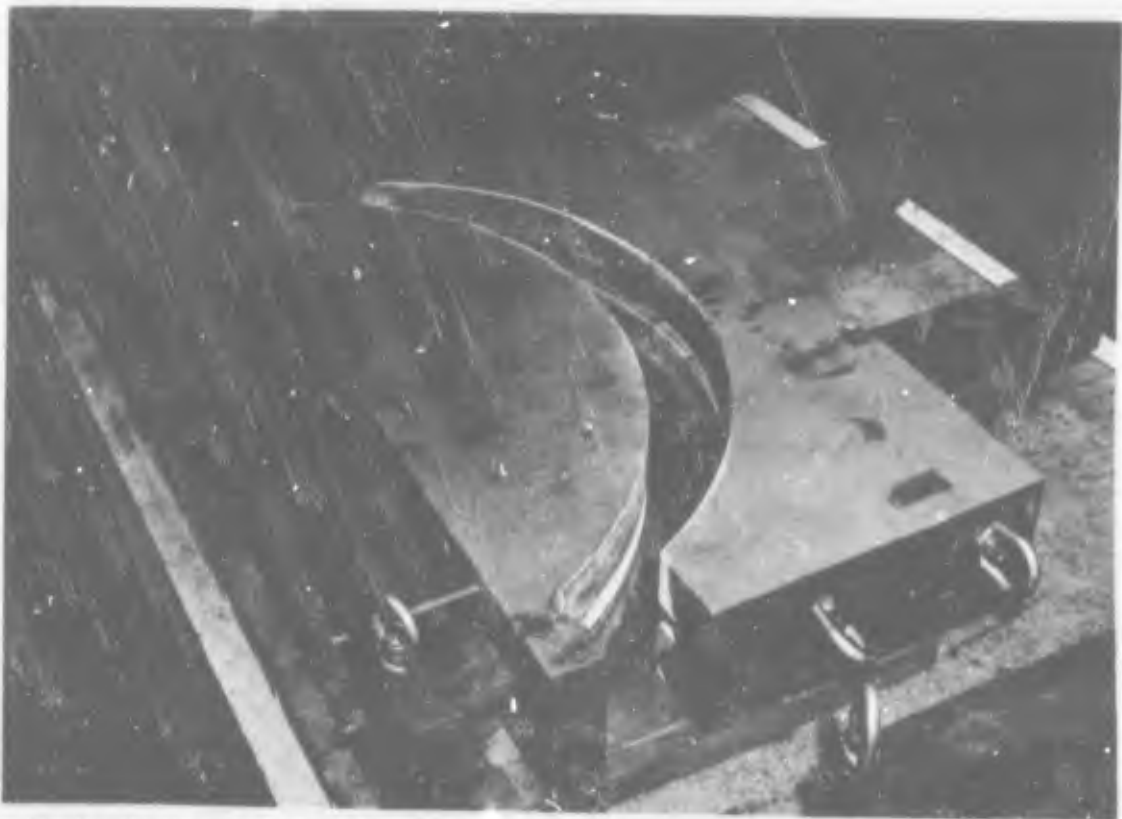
Horizontal Forming Die for Channel Member (RDM 1496, One-Step); Left Side Utilizes Bed Cushion Pressure, Right Side Utilizes Clamp Pressure
